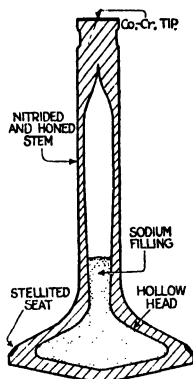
Cross Section of Modern Hollow-head Exhaust Valve
